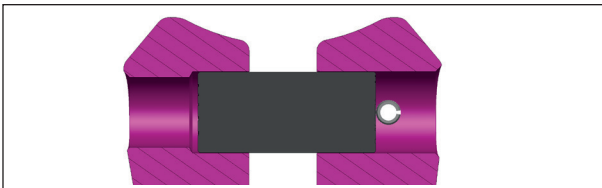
G bolt assembly by means of clamping pin and stepped hole (left). A G bolt of the next smaller size falls out.
